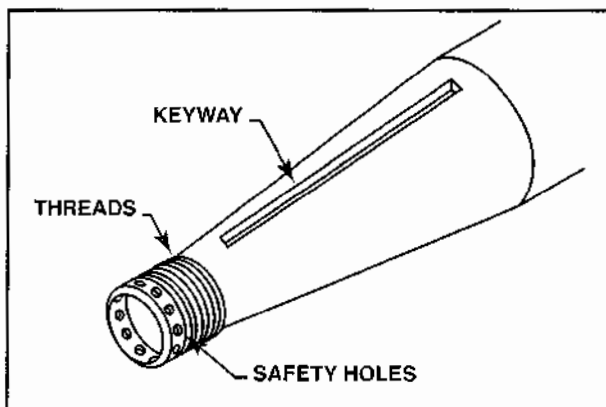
On some low-horsepower engines, the crankshaft is tapered and threaded on the end for propeller mounting.
